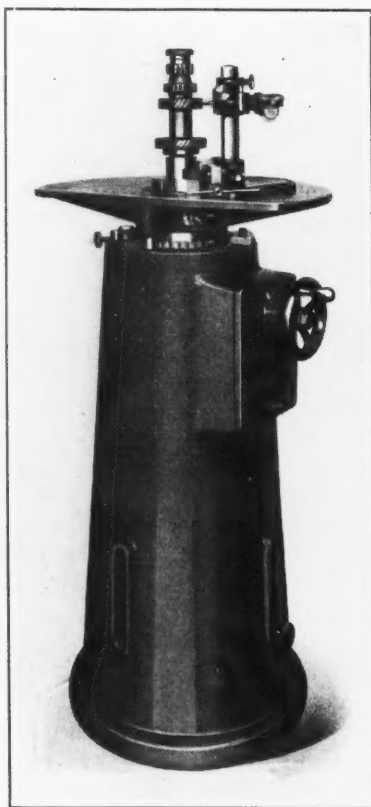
A Machine that Provides New Methods of Inspecting High-speed Transmission Gears
